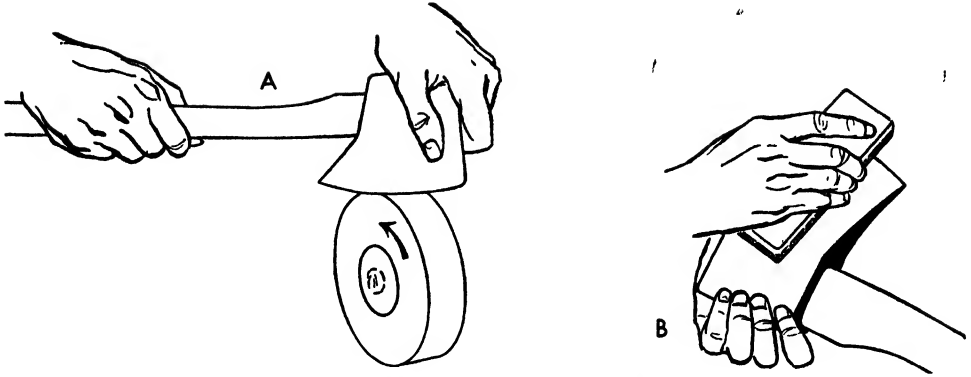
Sharpening an ax. After grinding (A), a smooth, keen edge may be produced by whetting with an oilstone (B).
